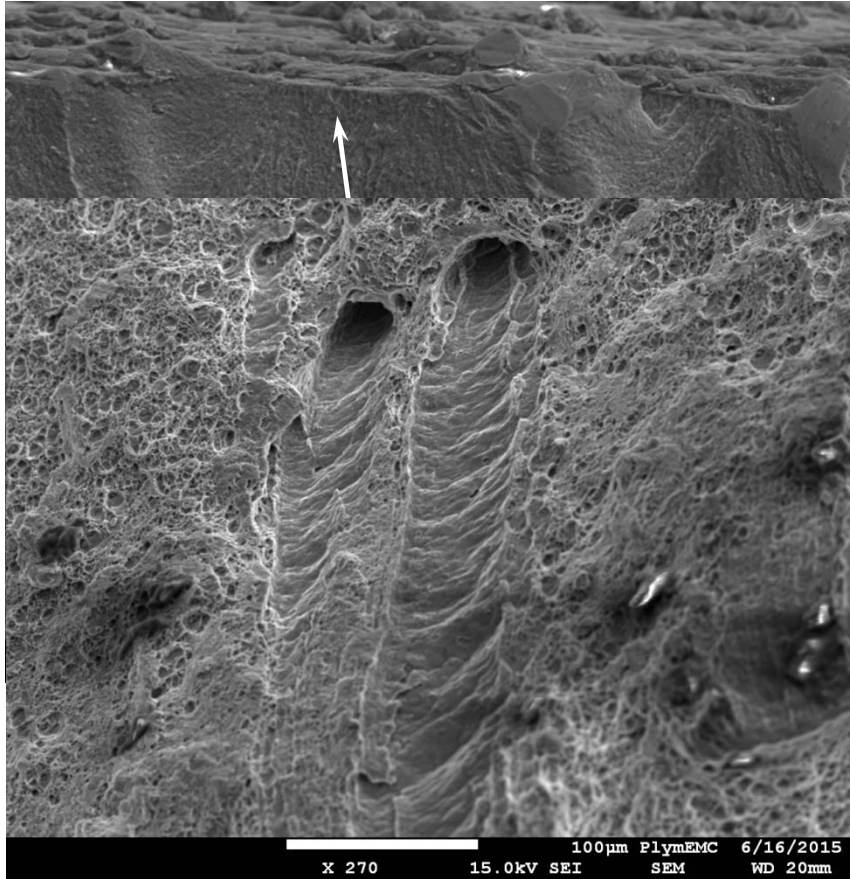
SEM fractograph showing crack initiation (arrow) between surface tool marks in tensile fatigue specimen W121. The small white bar at the bottom of the picture is a 10 µm marker.
